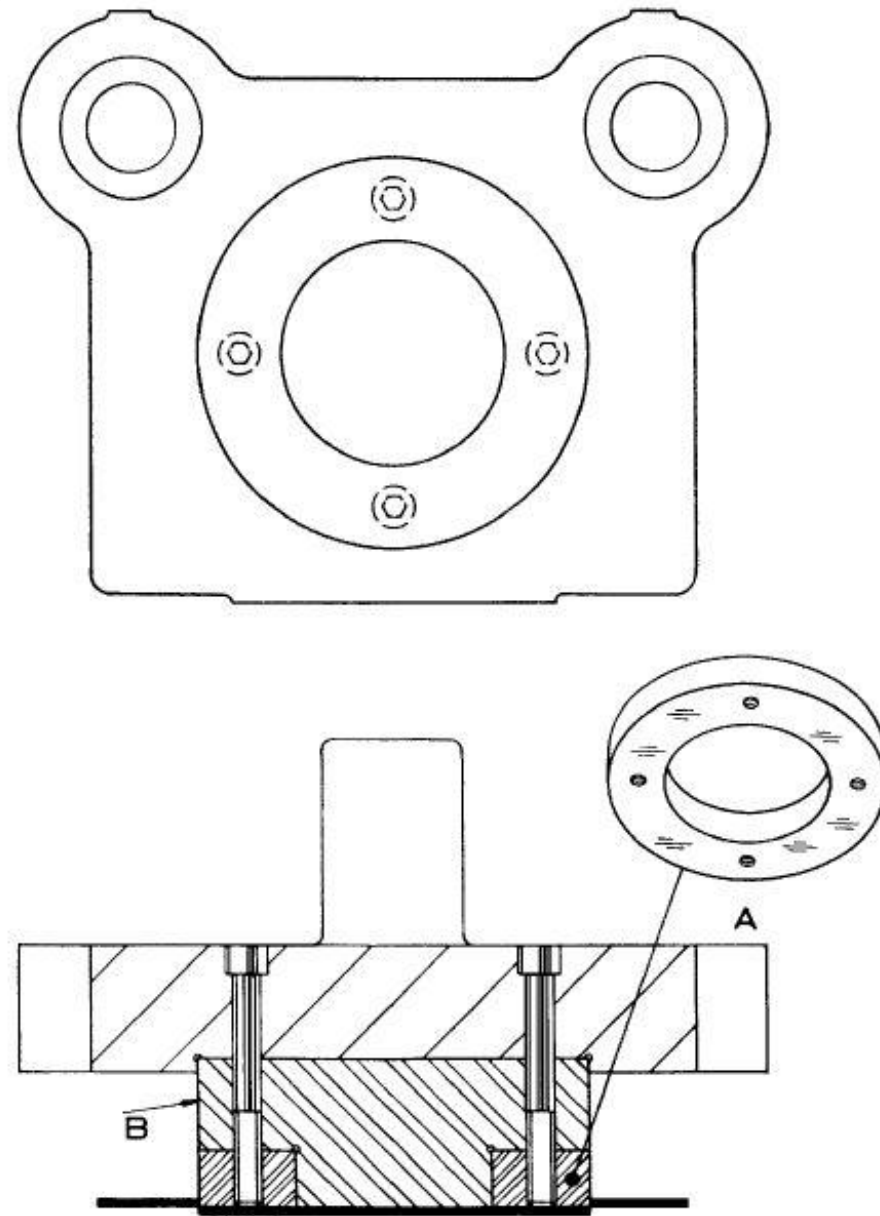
This large circular blanking punch is made in two parts to conserve tool steel.
